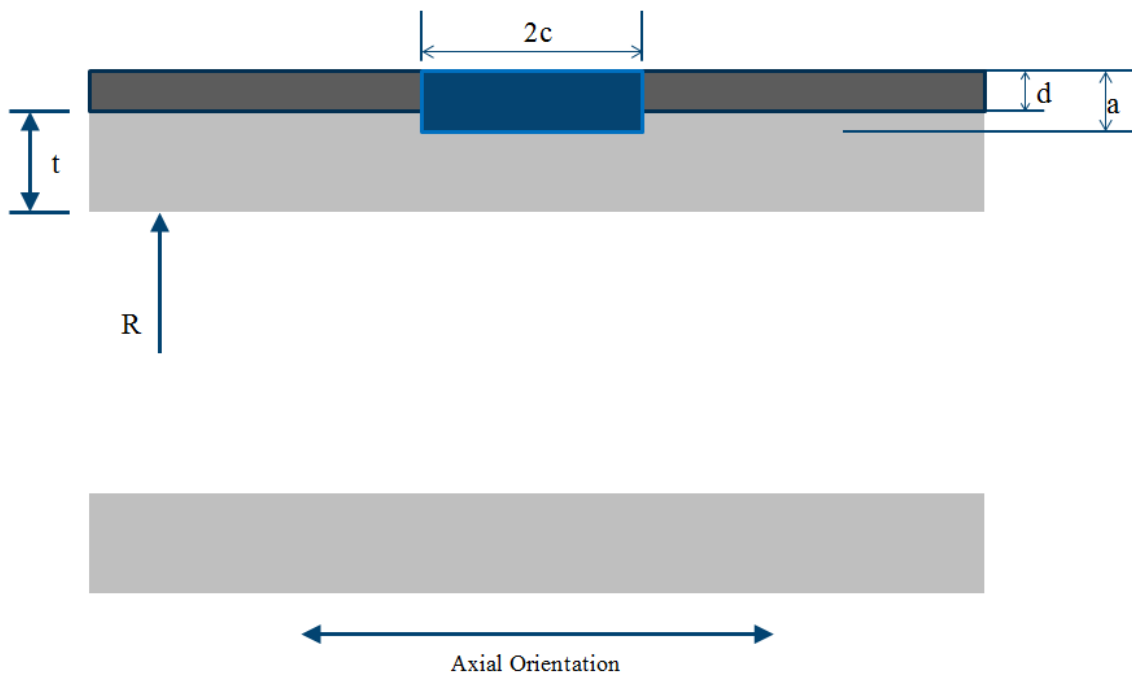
2D Planar Sketch of Axial, Rectangular, Part Through-Wall Crack on OD
